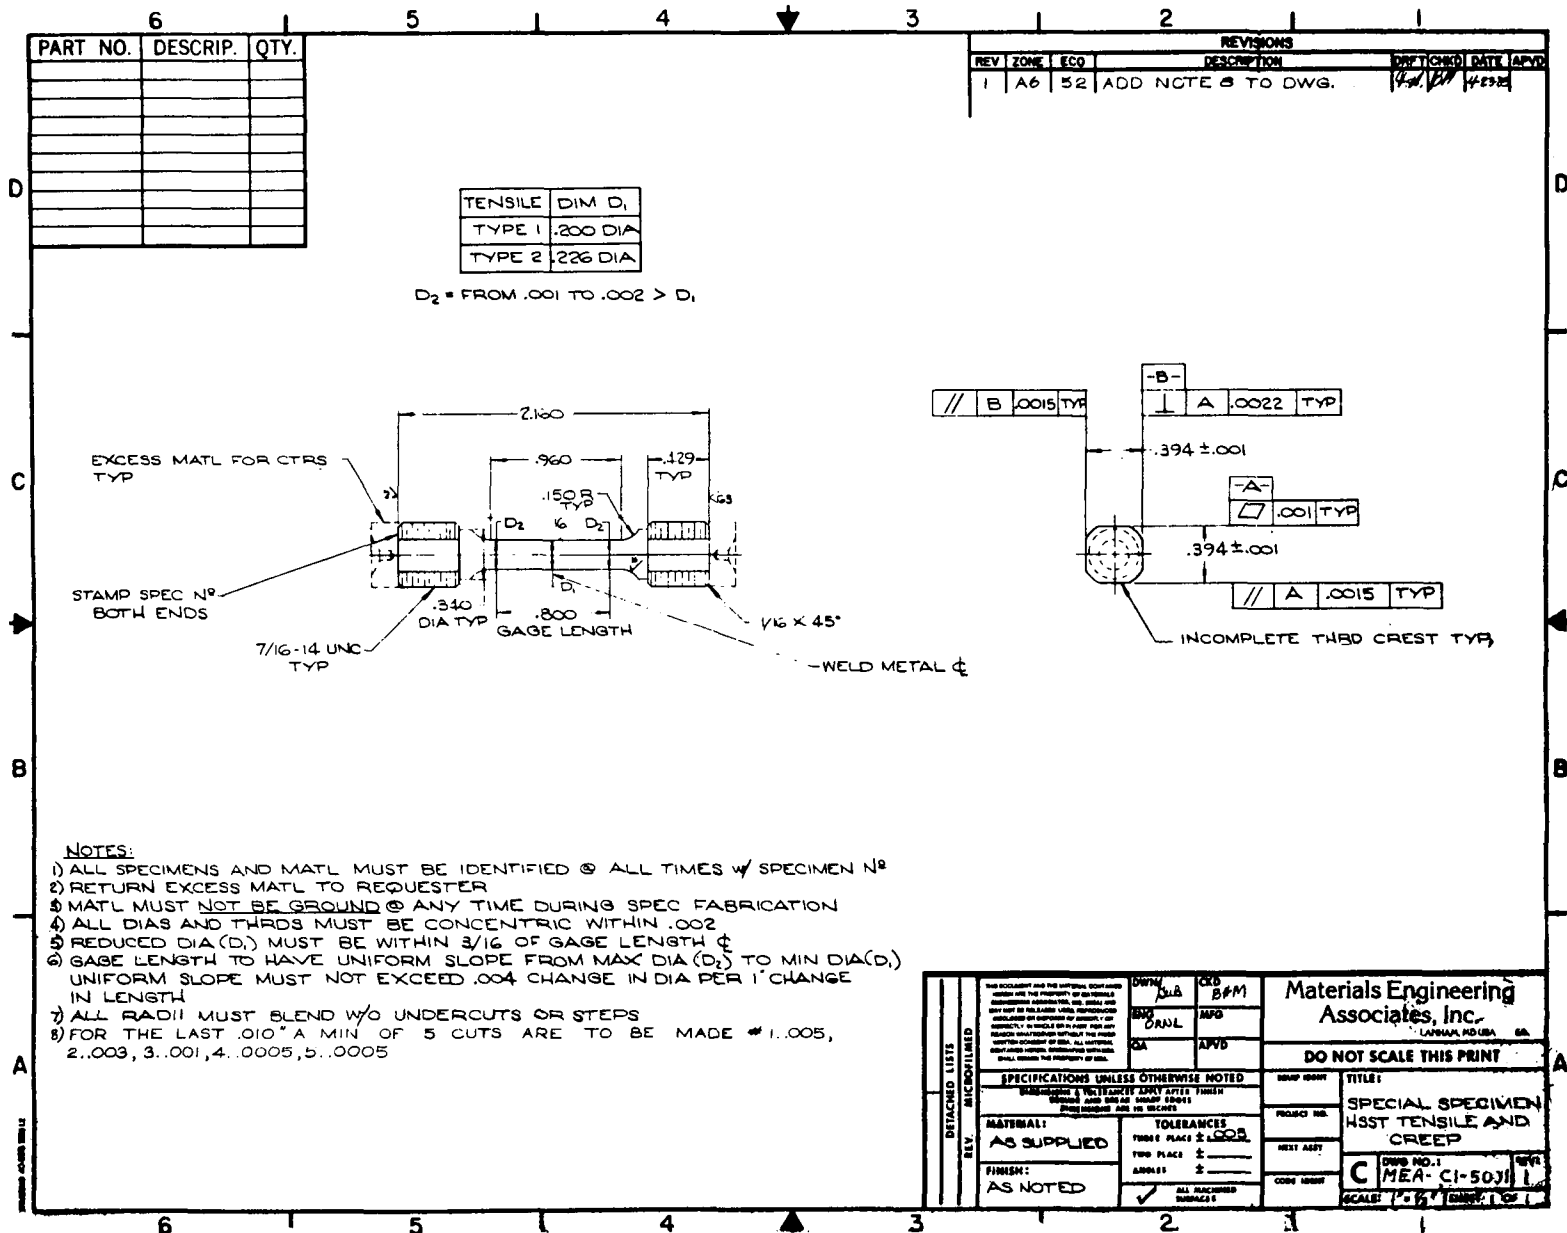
Design of threaded-end, C_v -size tension test specimen. The Type 2 Design was used.
